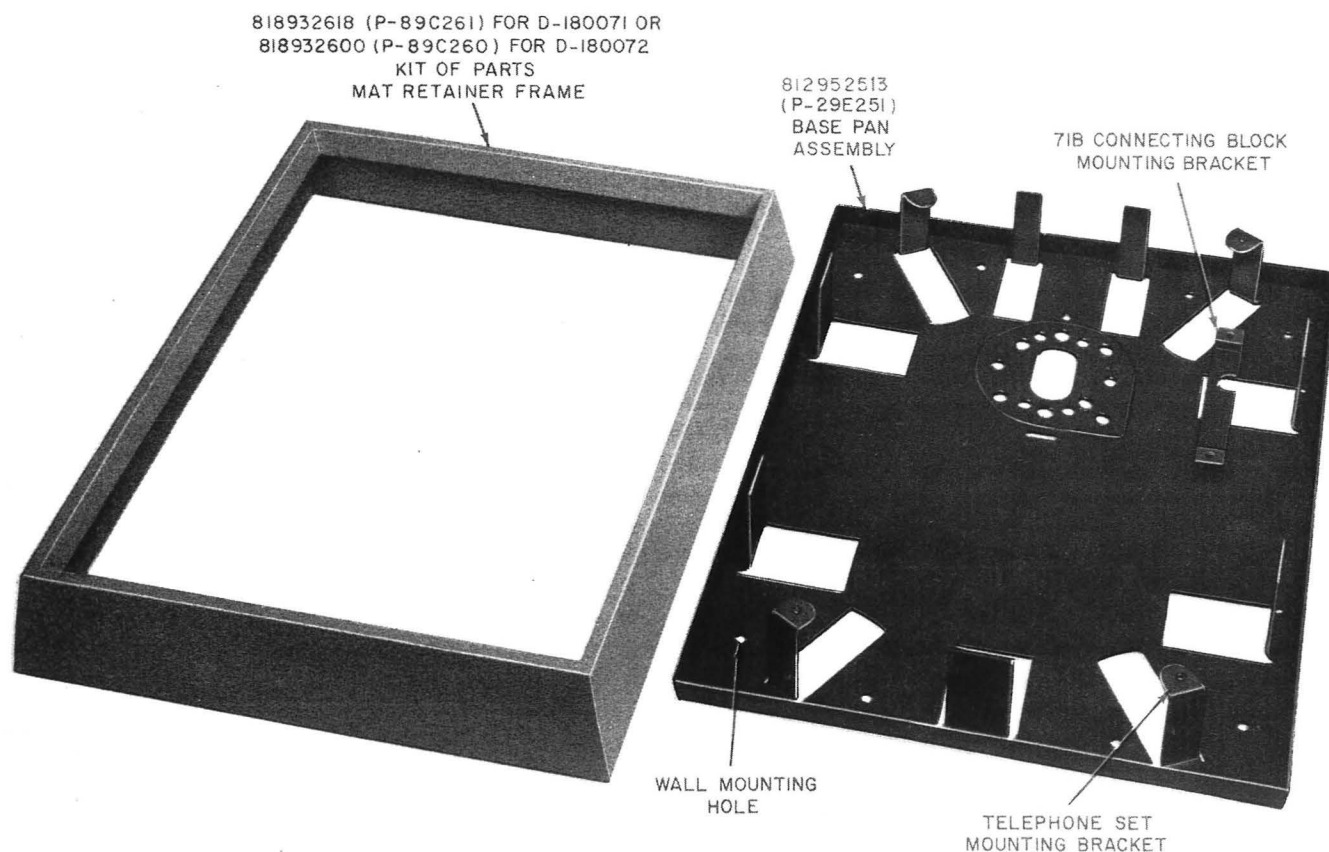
D-180071 or D-180072 Kit of Parts for Surface Mounting
